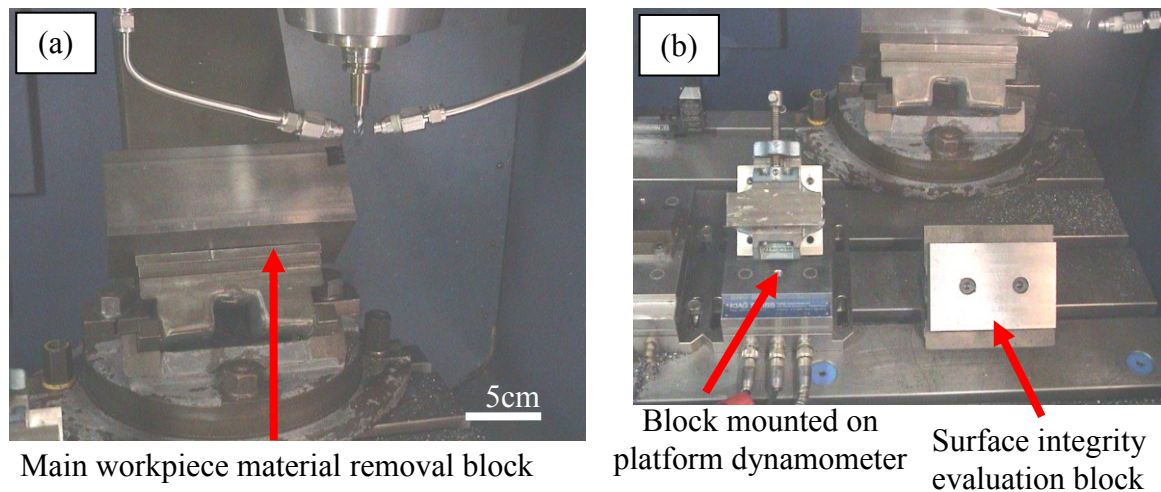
γ -TiAl workpiece, nozzle and cutting tool holder setup
